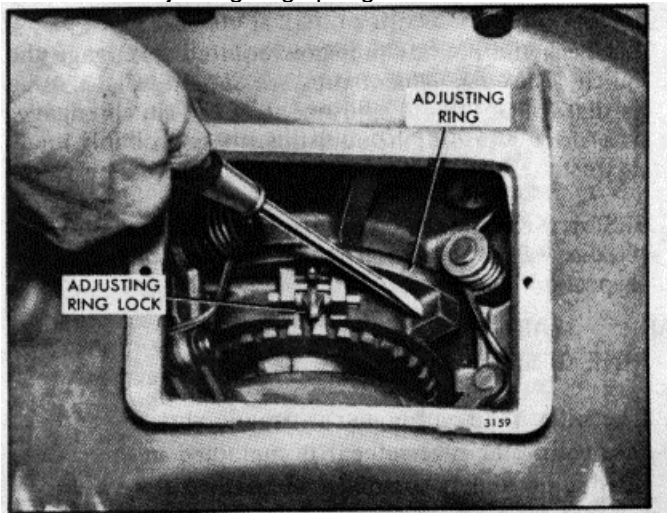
Power Take-Off Assembly Showing 14 Inch Diameter Clutch Adjustment Ring
